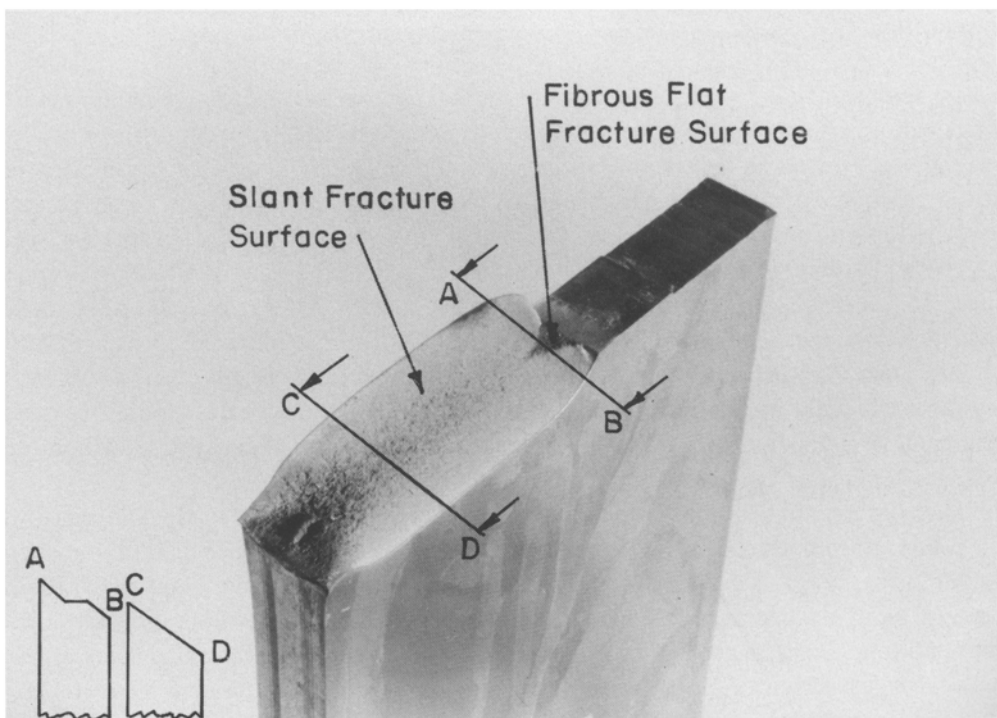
Photograph of fracture surface of 4340 steel specimen used in [8].
